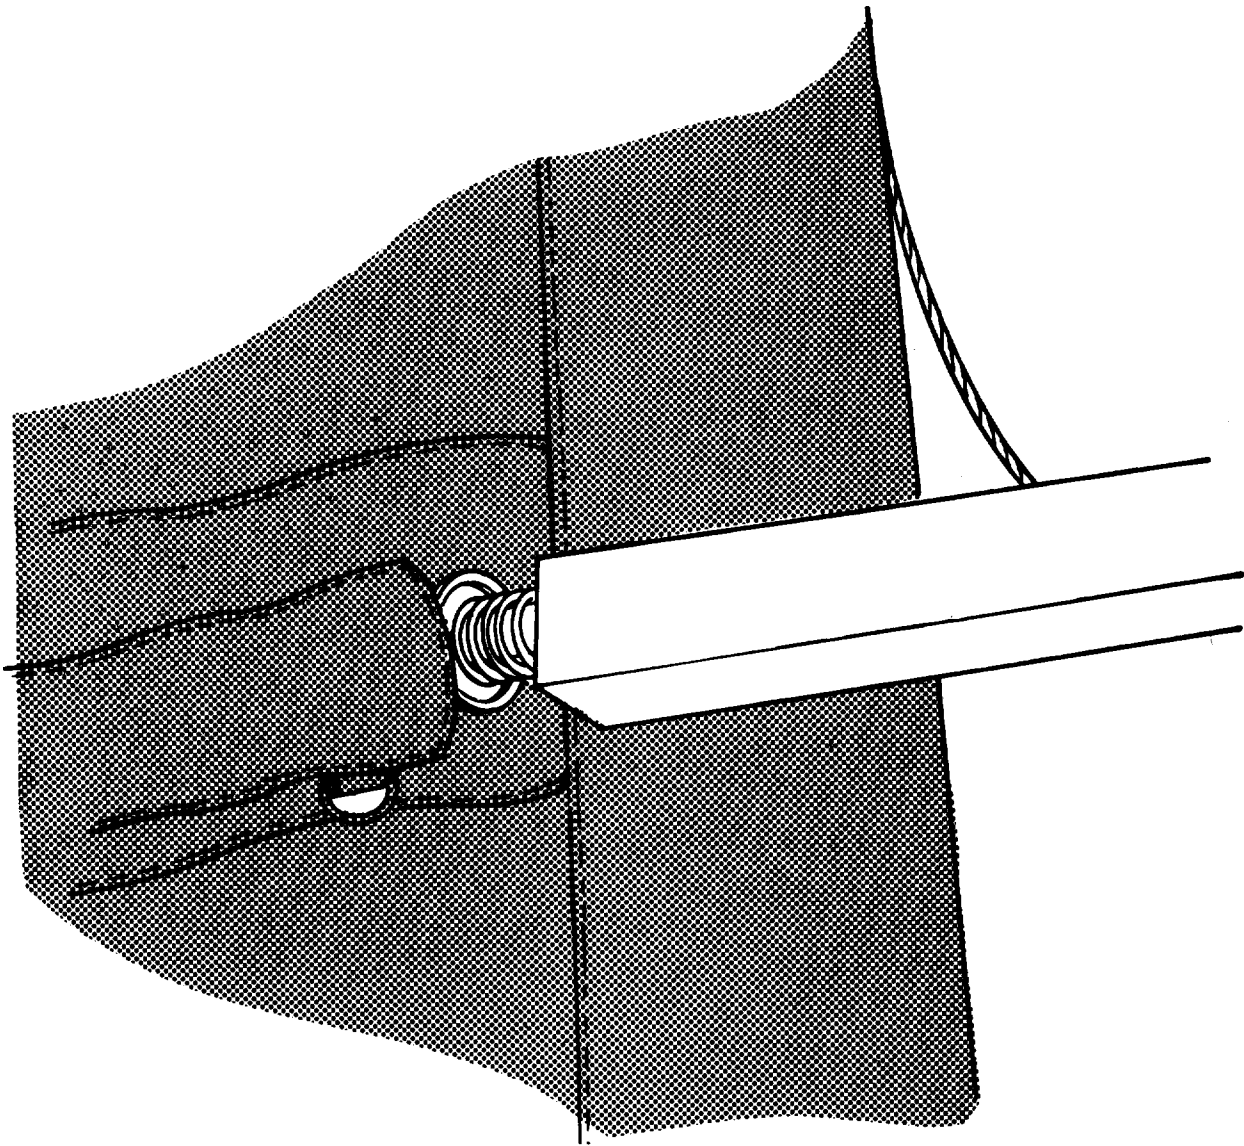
Doorpost assembly and door control arm (Sheet 1 of 2).
